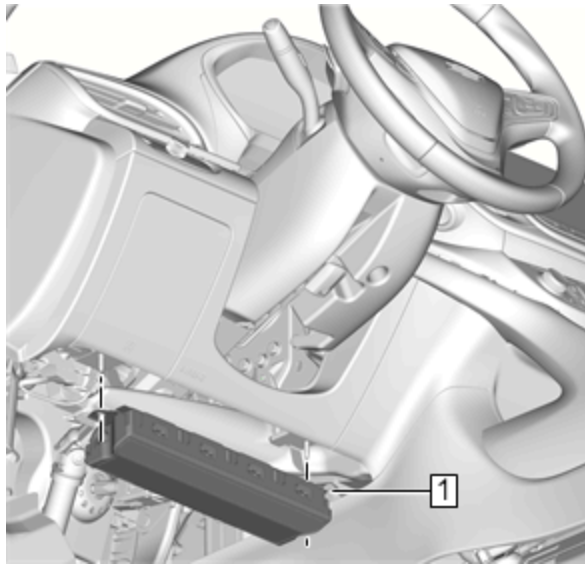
Instrument Panel Lower Airbag - Driver Side
